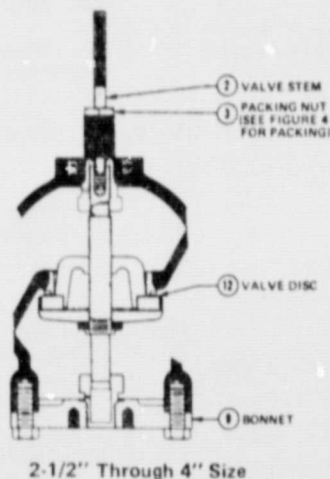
VALVE DISC REPLACEMENT, VP2511 VALVES
